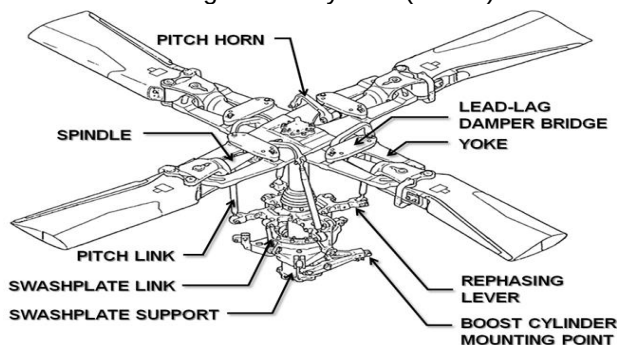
NRC-FRL Bell412 ASRA, Hingeless Rotor Hub and Rotor System Controls (Ref. 8)
